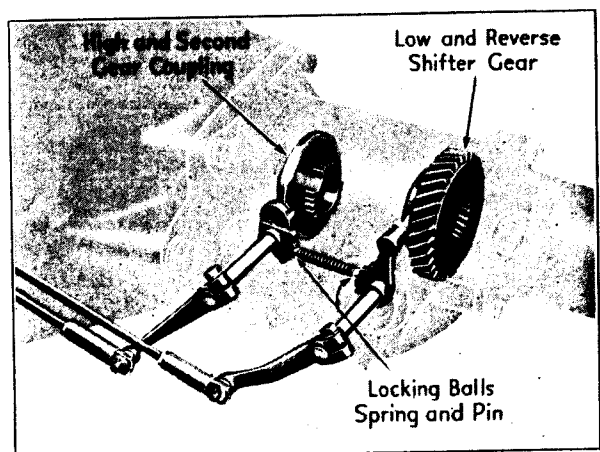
Phantom view of gear shifting mechanism in transmission (all 38-series)
